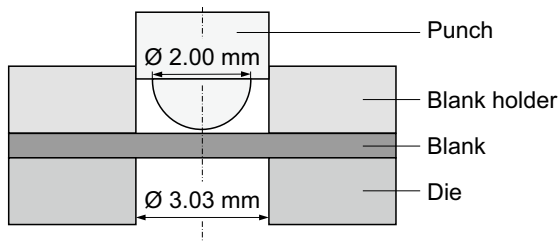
Schematic illustration of the embossing tool. The used spherical punch had a diameter of 2.00 mm, the die had a diameter of 3.03 mm. A blank holder kept the blank in position
